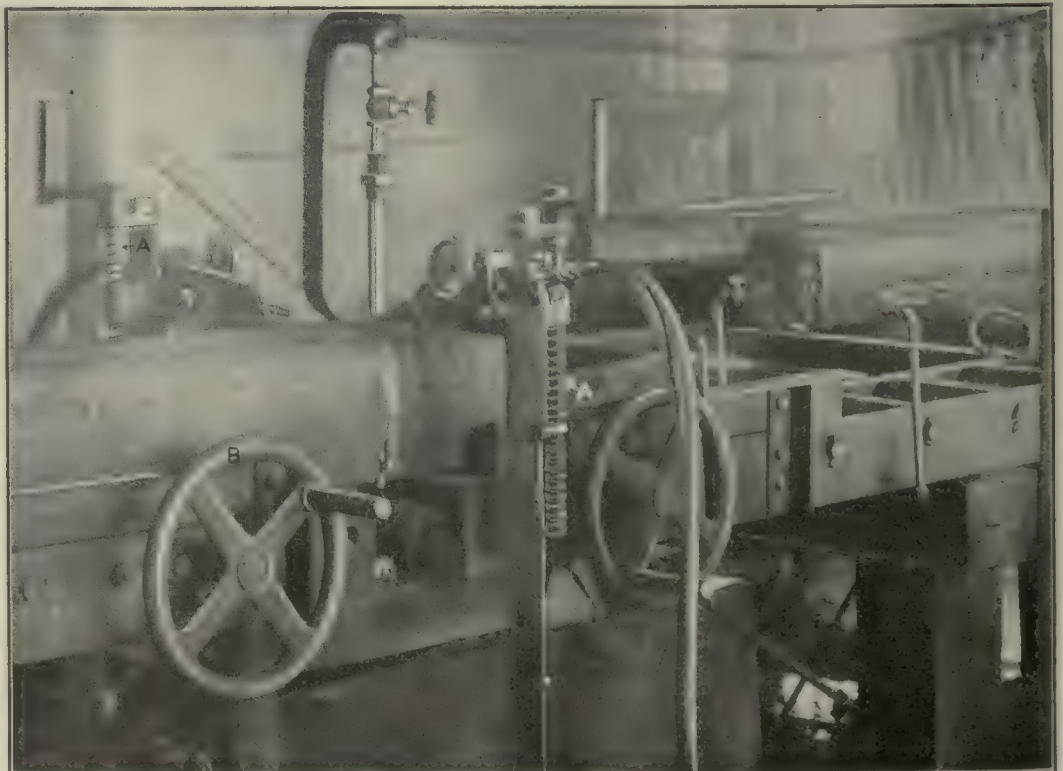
OXYACETYLENE BAR-CUTTING MACHINE
